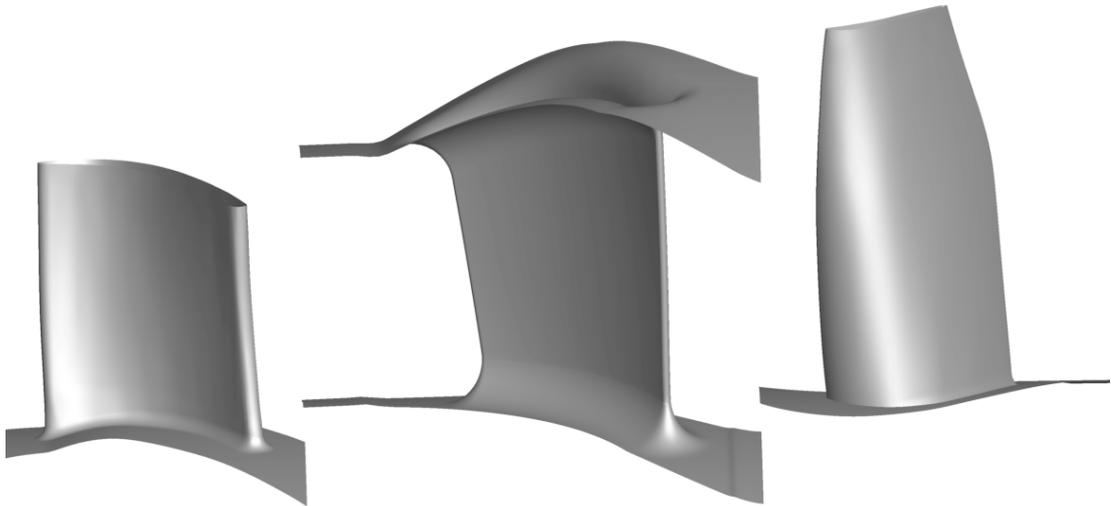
Three-dimensional view of HPT rotor blade, LPT vane and LPT rotor blade
